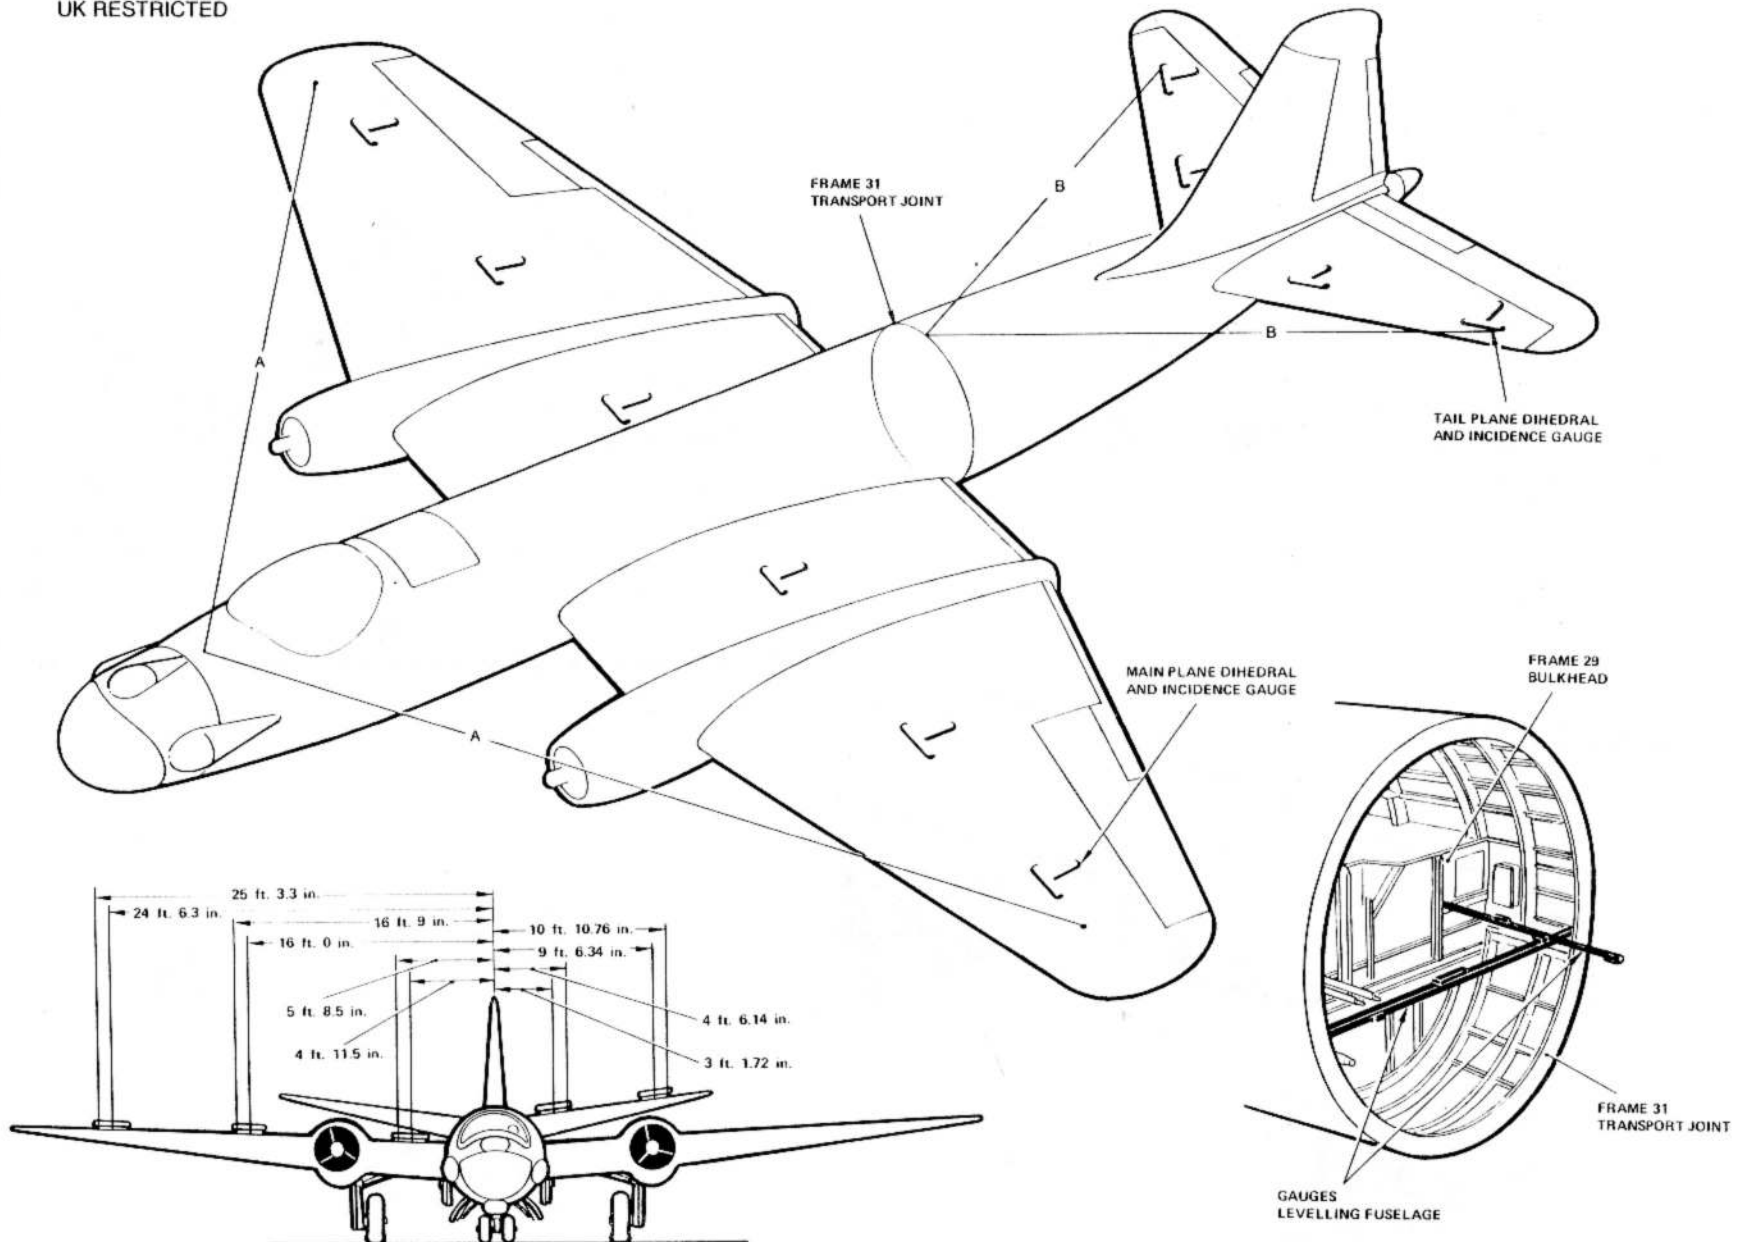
ALIGNMENT CHECKS AND RIGGING GAUGE POSITIONS
